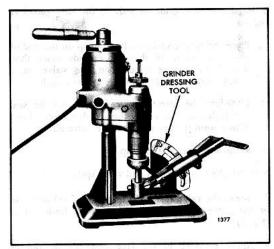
Grinding Wheel Dressing Tool or Set J 8165-1
